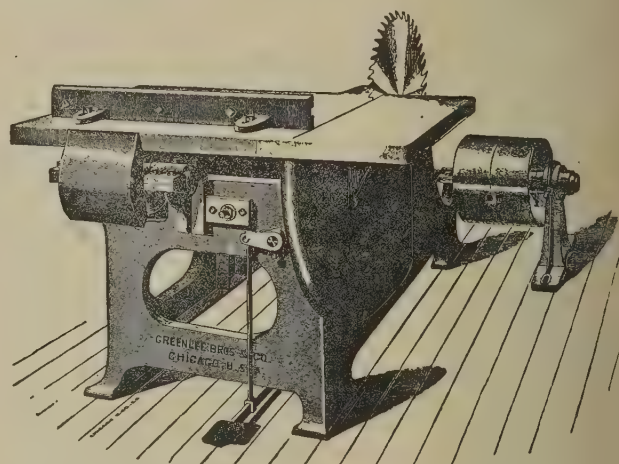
AUTOMATIC CUT-OFF MACHINE.
